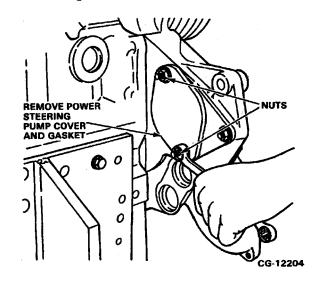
Remove Power Steering Pump or Cover and Gasket
